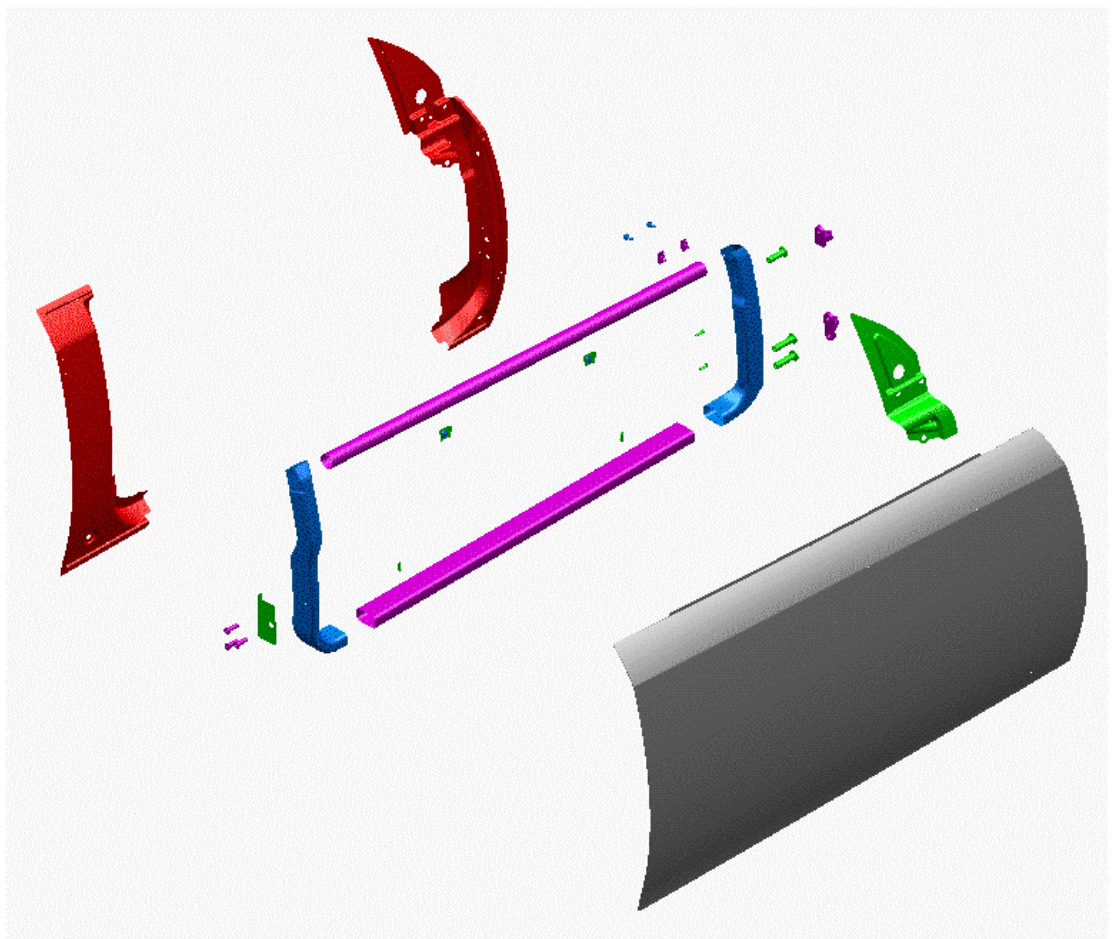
Exploded view of C-Class Door Structure
